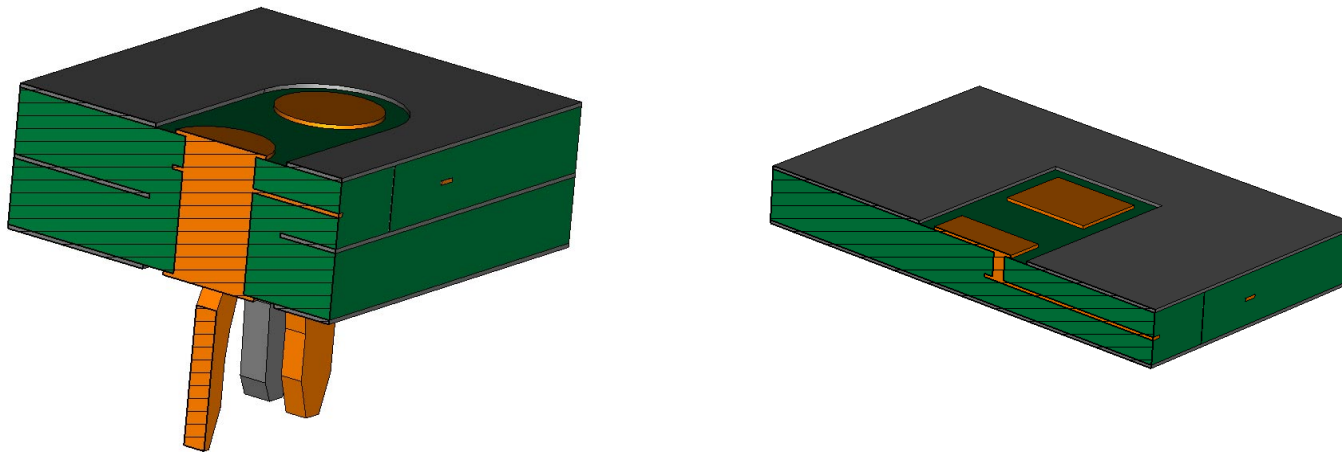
Connector to board interfaces: pressfit pins - SMD pins
